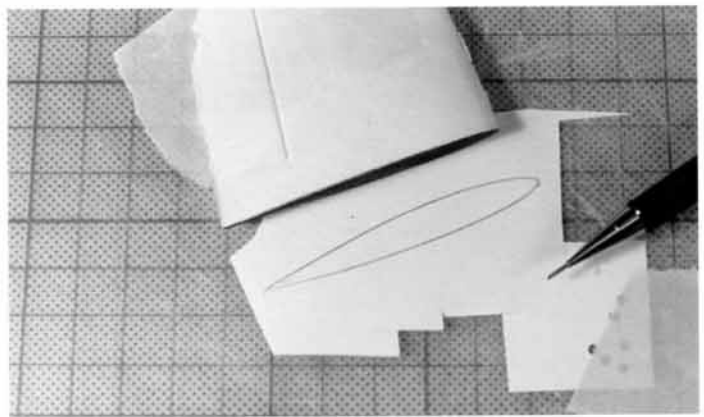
To trace the cross-sectional shape, tape a piece of sheet stock to your cutting board. Position the cut part onto the sheet stock and carefully trace along the edge using a .5 mm or smaller lead pencil. Be very careful not to move the part while you are tracing it.
